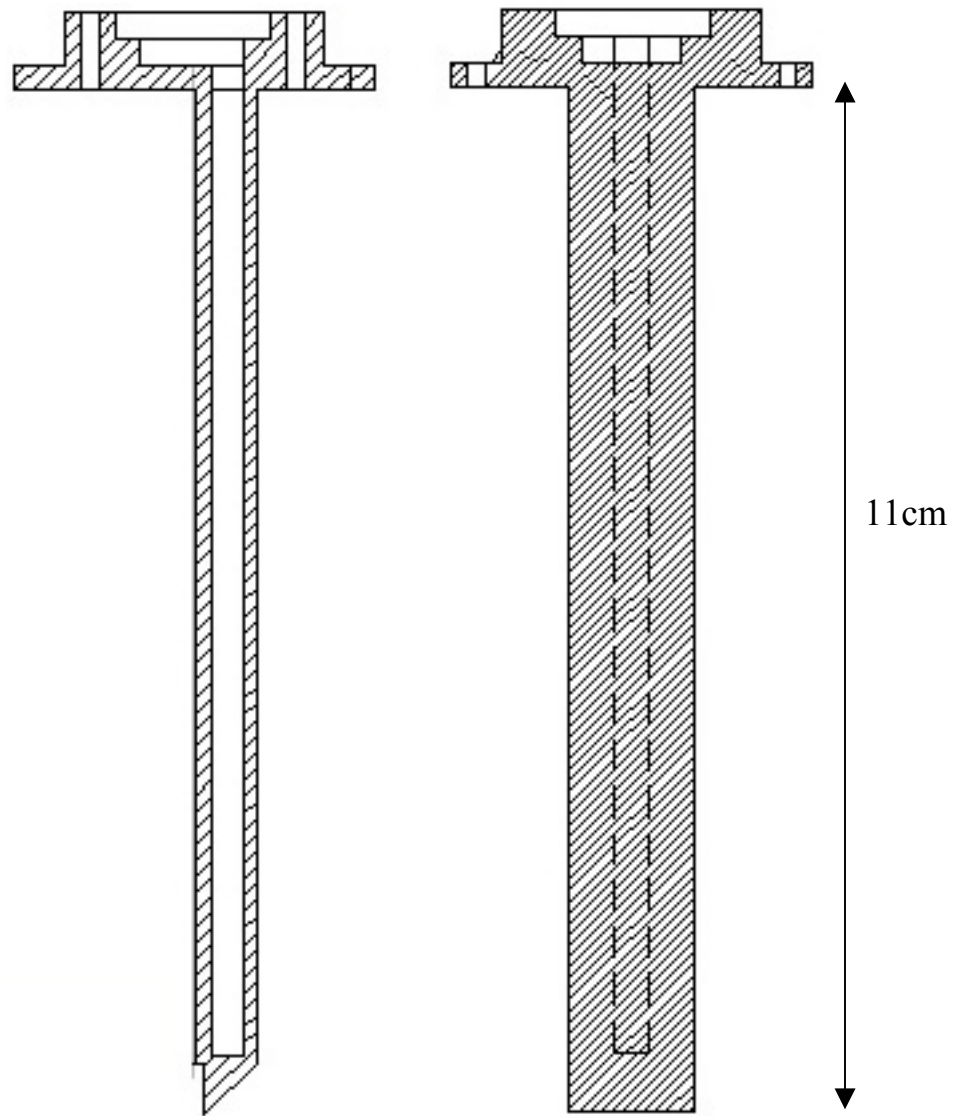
(a) Side view, (b) front view of design of hollow Cu part of cold-finger.
